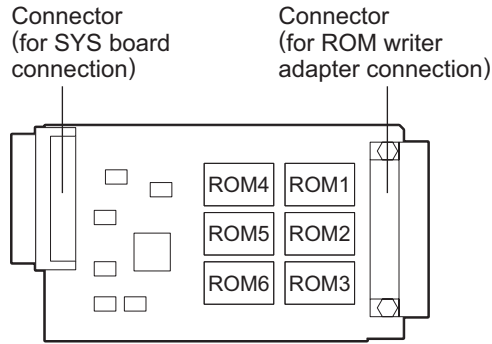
Jig board: PWA-DWNLD-350-JIG2 (48 MB)
